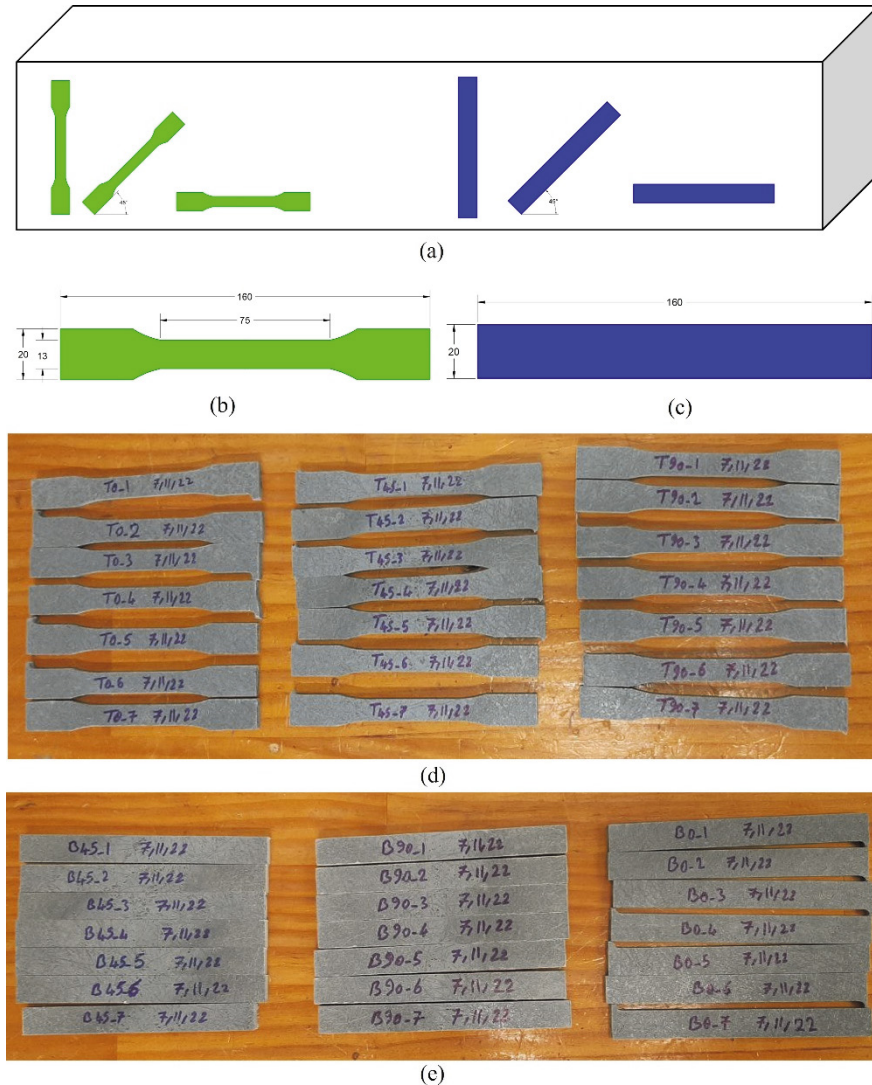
(a) Hollow section of pultruded GFRP section and cut plan, (b) dimensions of tensile specimens, (c) dimensions of 3-point bending specimens, (d) tensile specimens, and (e) 3-point bending specimens.
